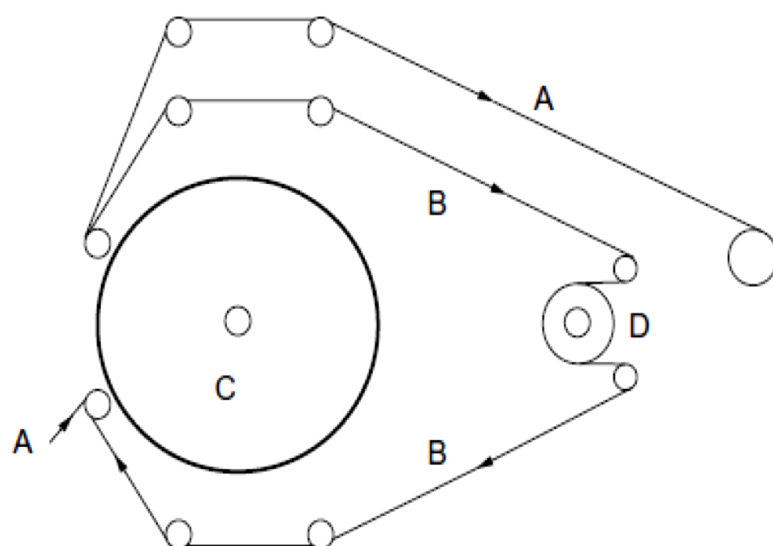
Schematic diagram of a felt calender: (A) fabric, (B) blanket, (C) large heated cylinder and (D) small roller to control tension in the blanket.
